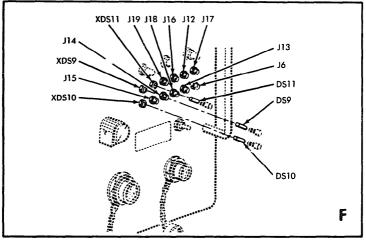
(6). Test set panel assembly 1A3, location of parts (sheet 6 of 7).
